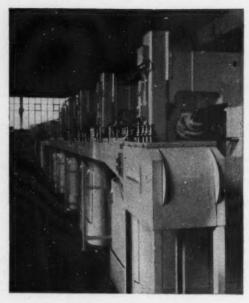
View from the starting end of the Churchill fully-automatic machine line for producing gearbox cluster gears
